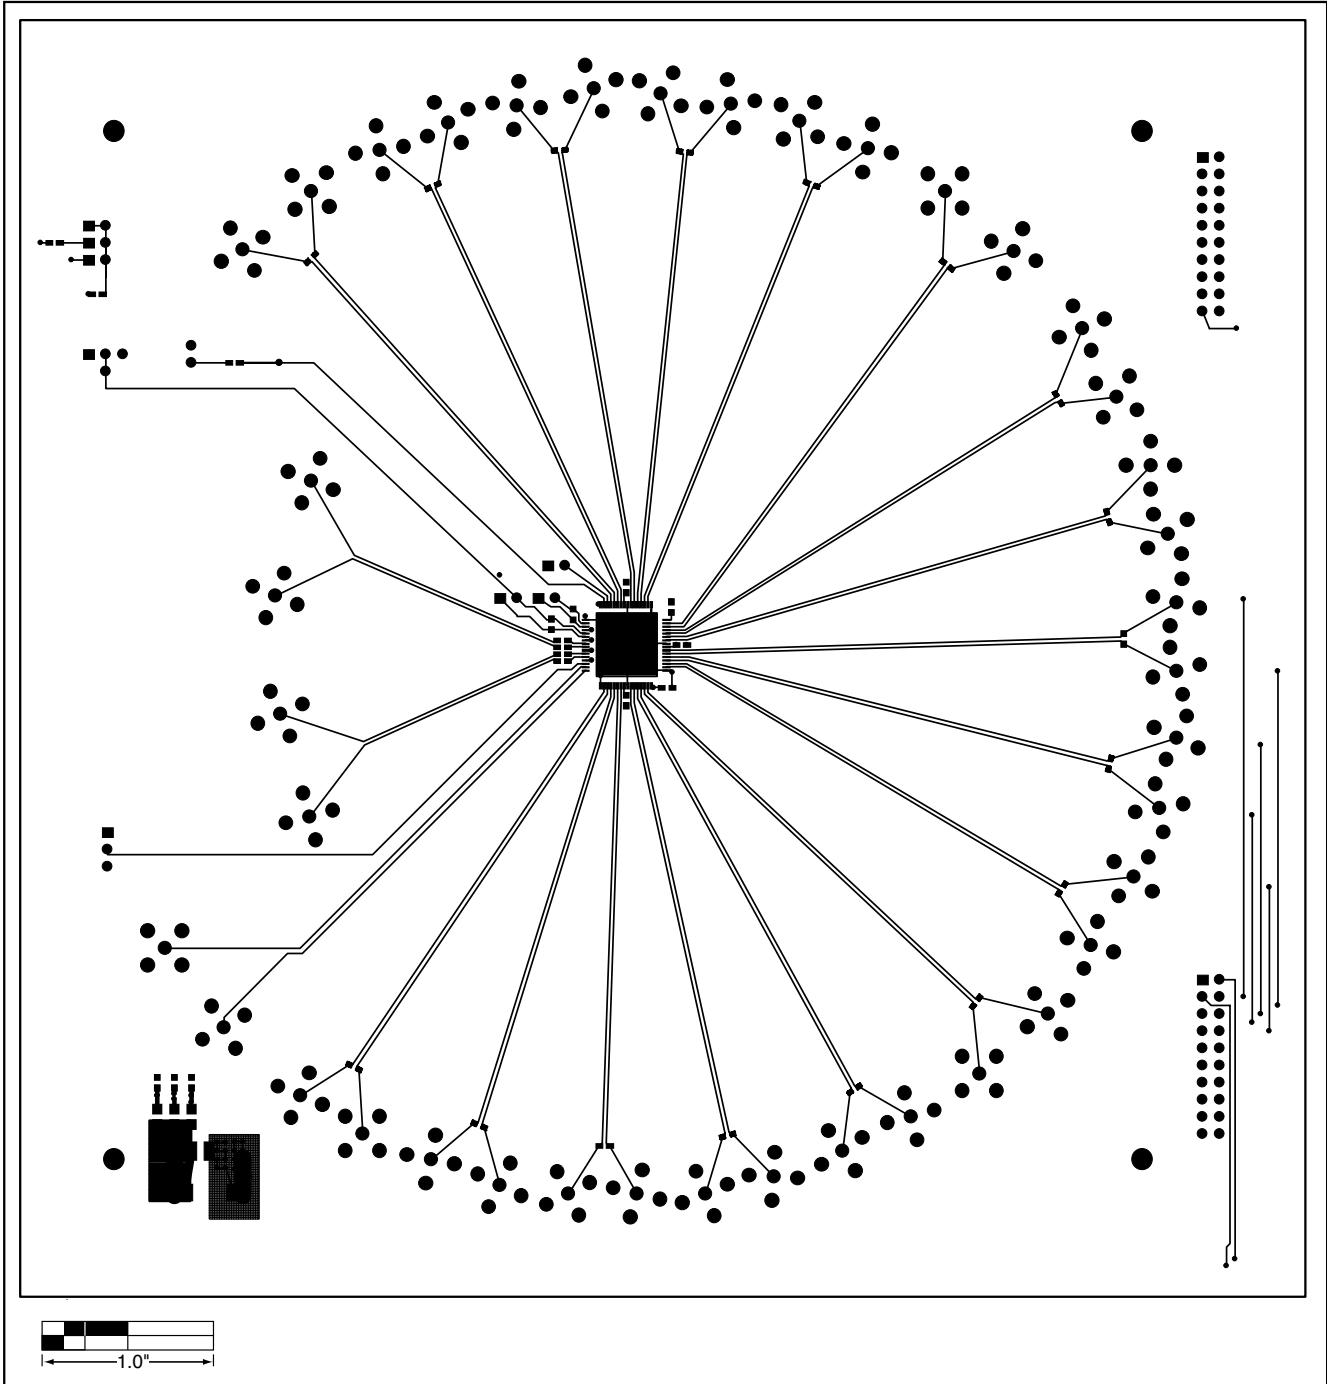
MAX3880 EV Kit PC Board Layout—Component Side
